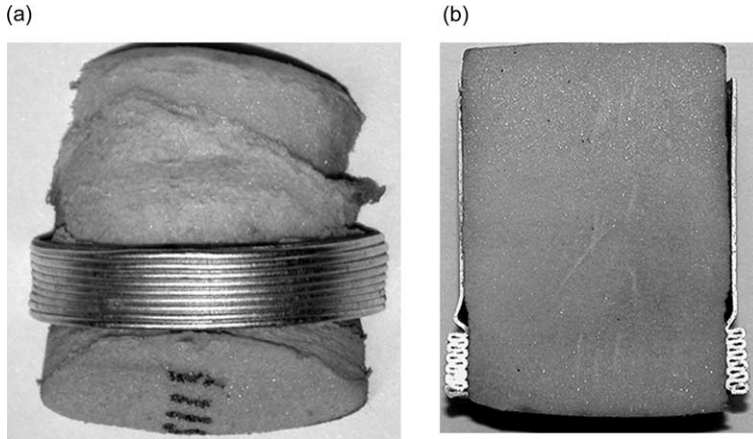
F3500 filled 25 mm Al tube views, (a) side and (b) interior (partially compressed).
